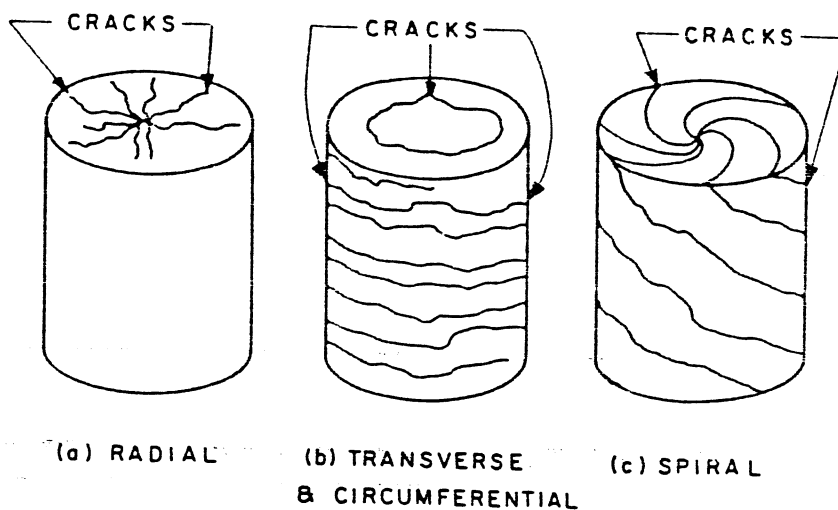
Various types of cracks produced in explosive consolidation using the cylindrical geometry. Adapted from [3], p.88.
